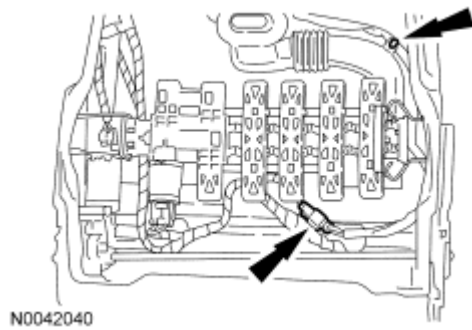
Locating Backrest TED Assembly Electrical Connector And Wiring Harness Retainer
